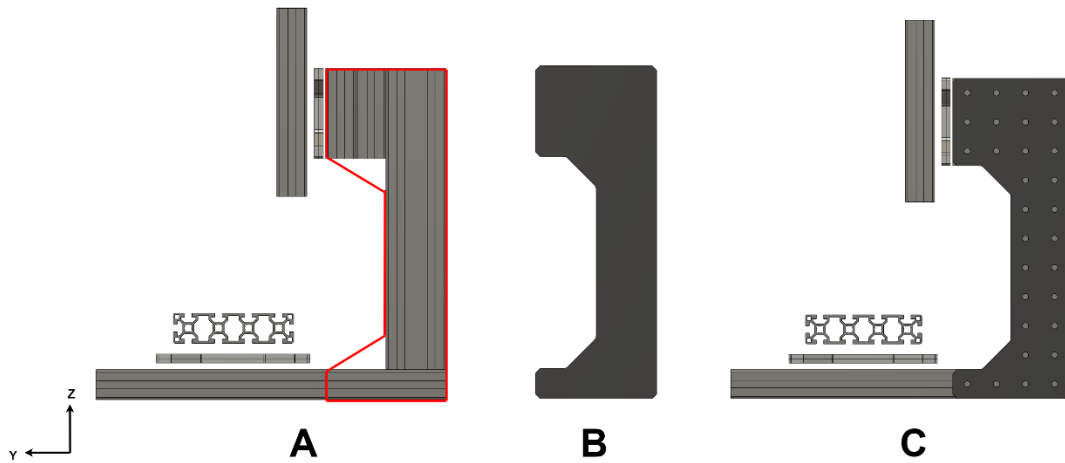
A- Z tower plate sketch along the current frame iteration; B - First Z tower plate concept; C - Z tower plate filled with 40mm spacing M8 holes for mounting fasteners.
